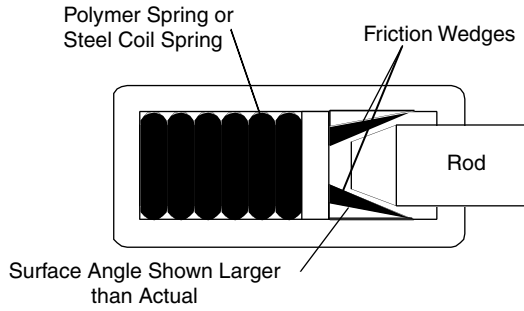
Friction type draft gear unit with angled surfaces.
